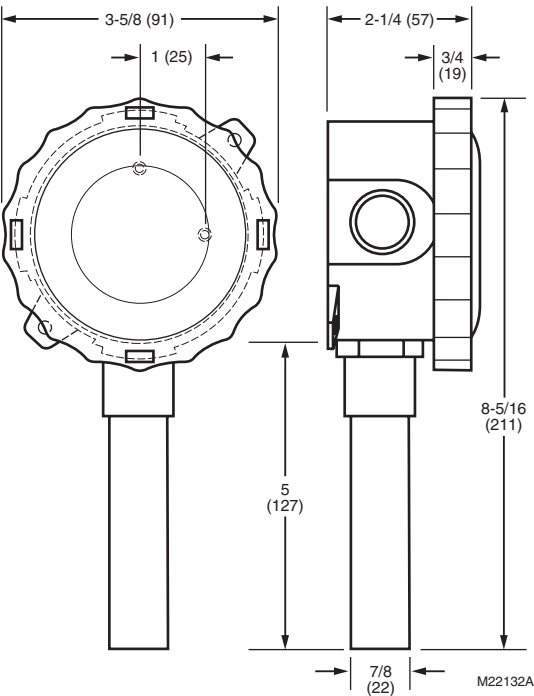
C7031G, C7021F, C7023F, C7041F Dimensions in Inches (mm).
